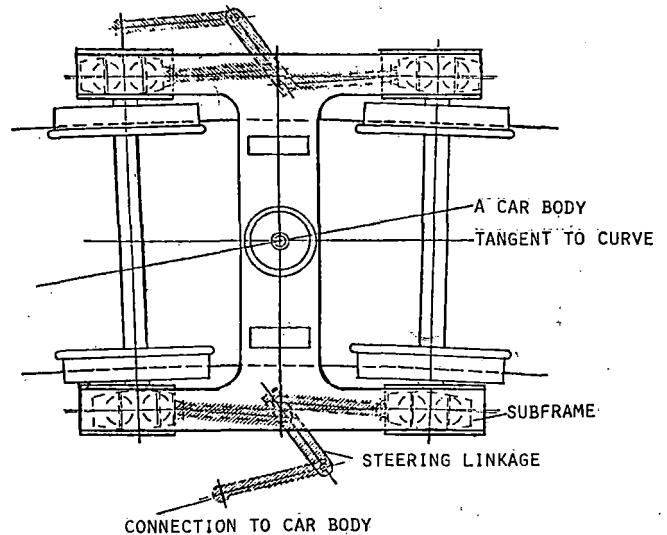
FORCED STEERING TRUCK LINKAGE MECHANISM.
